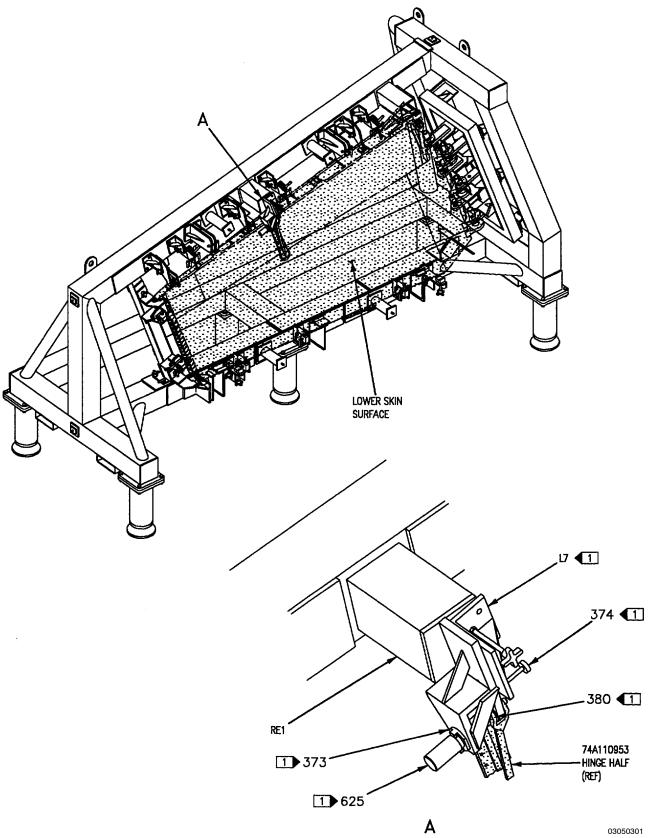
Drilling Holes in Skins or Substructure (Sheet 21)
